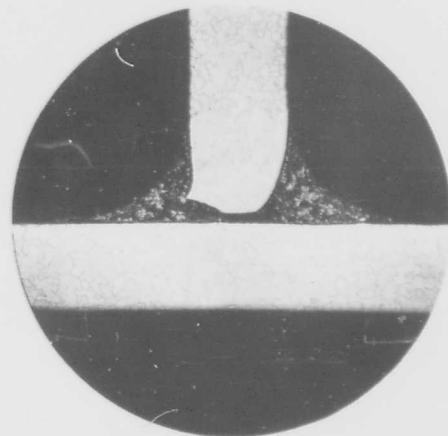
D-36 T-Joint--Ti-8.5% Si Braze (75X)
